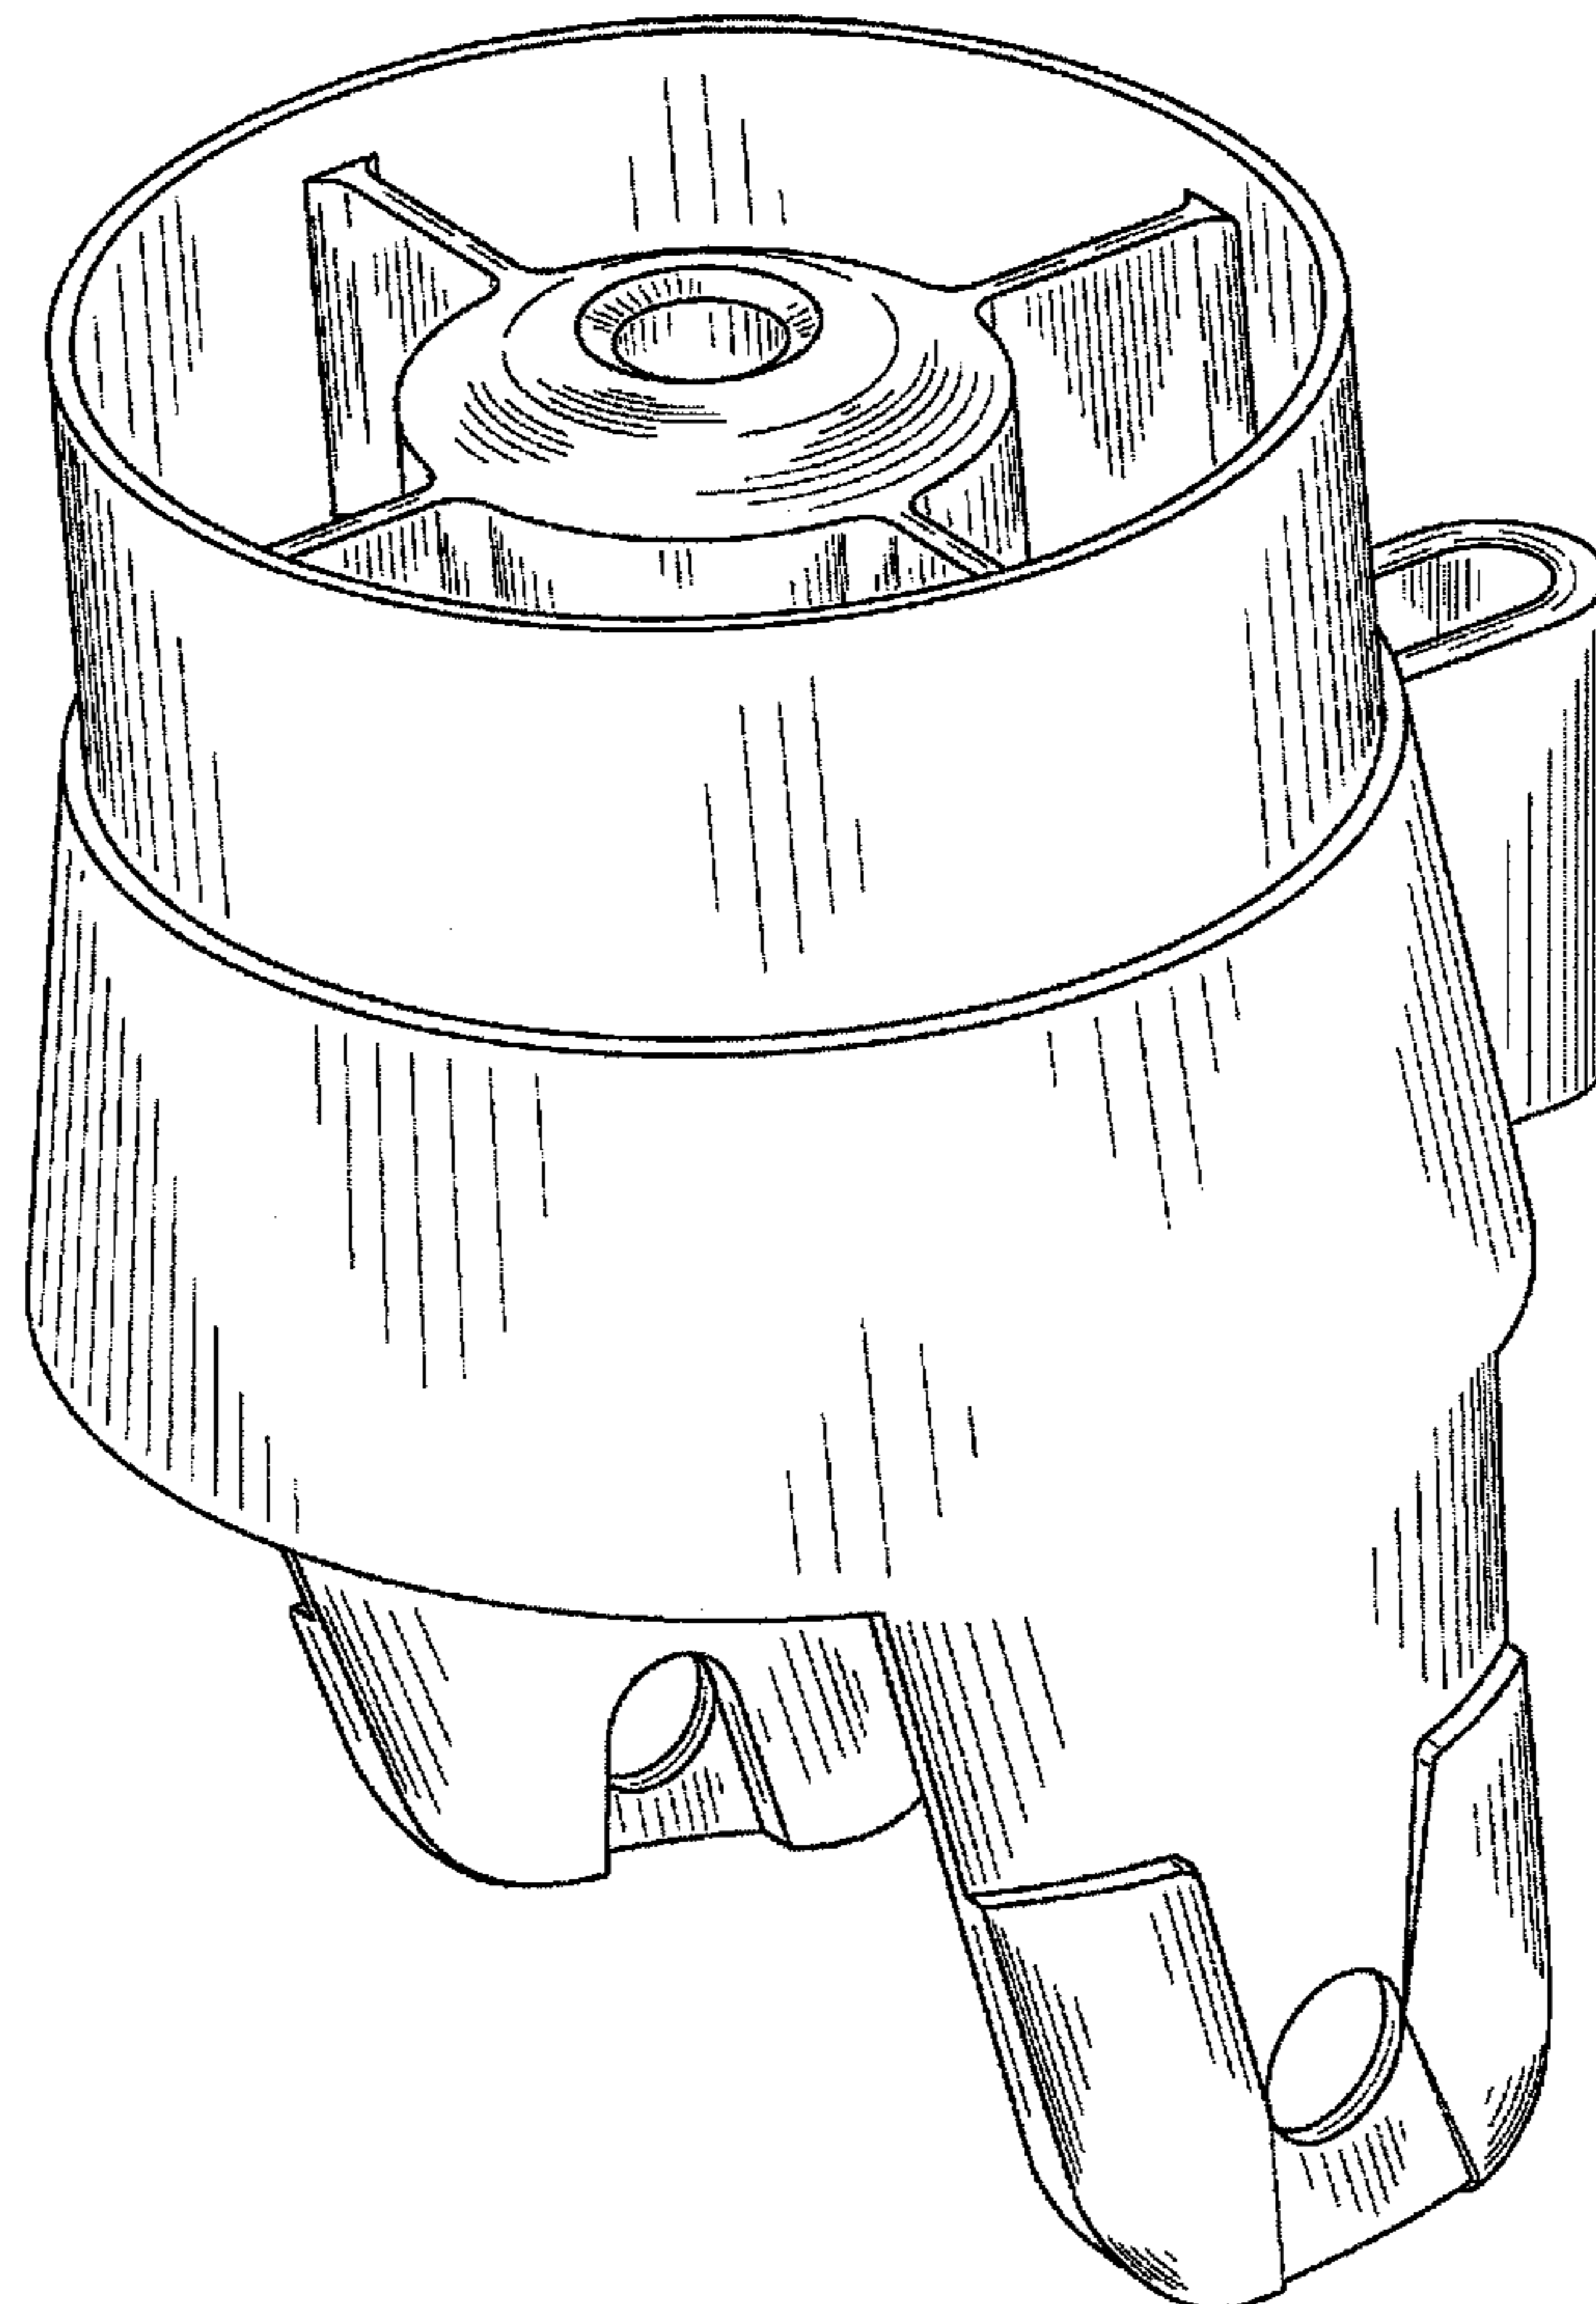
is a back side view of the nozzle shown in FIG. 1;
